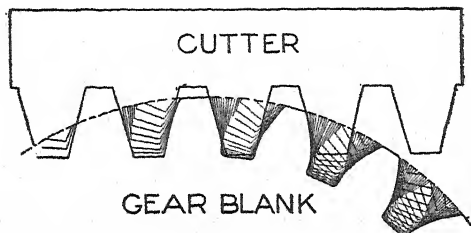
A Rack-Type Cutter Generating the Teeth of a Spur Gear.
